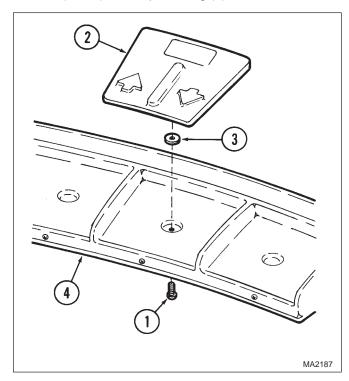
Foot Control Assembly Switch Cover Removal / Installation
